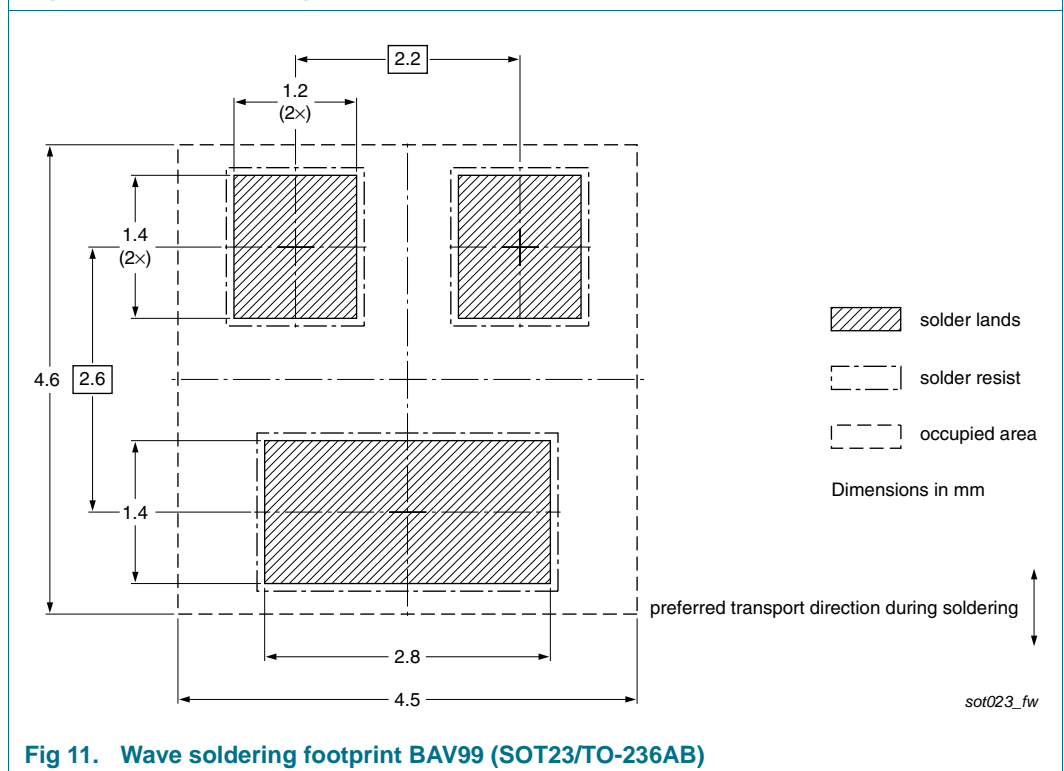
Wave soldering footprint BAV99 (SOT23/TO-236AB)
